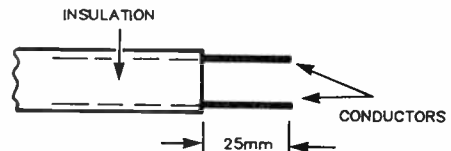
Preparing 300 ohm ribbon cable for attaching a plug. The conductors are soldered to the pins. Cut off any excess lead after soldering.
